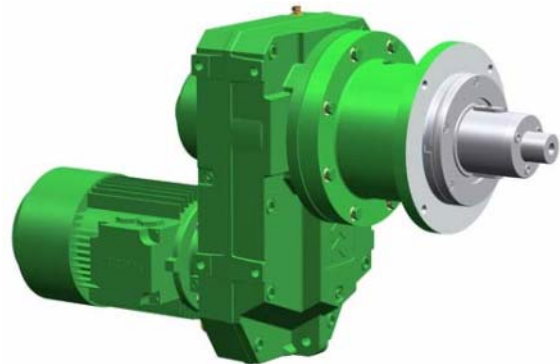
WATT shaft mounted geared motor AVS 85A 114ML4 TH with add-on bearing box
